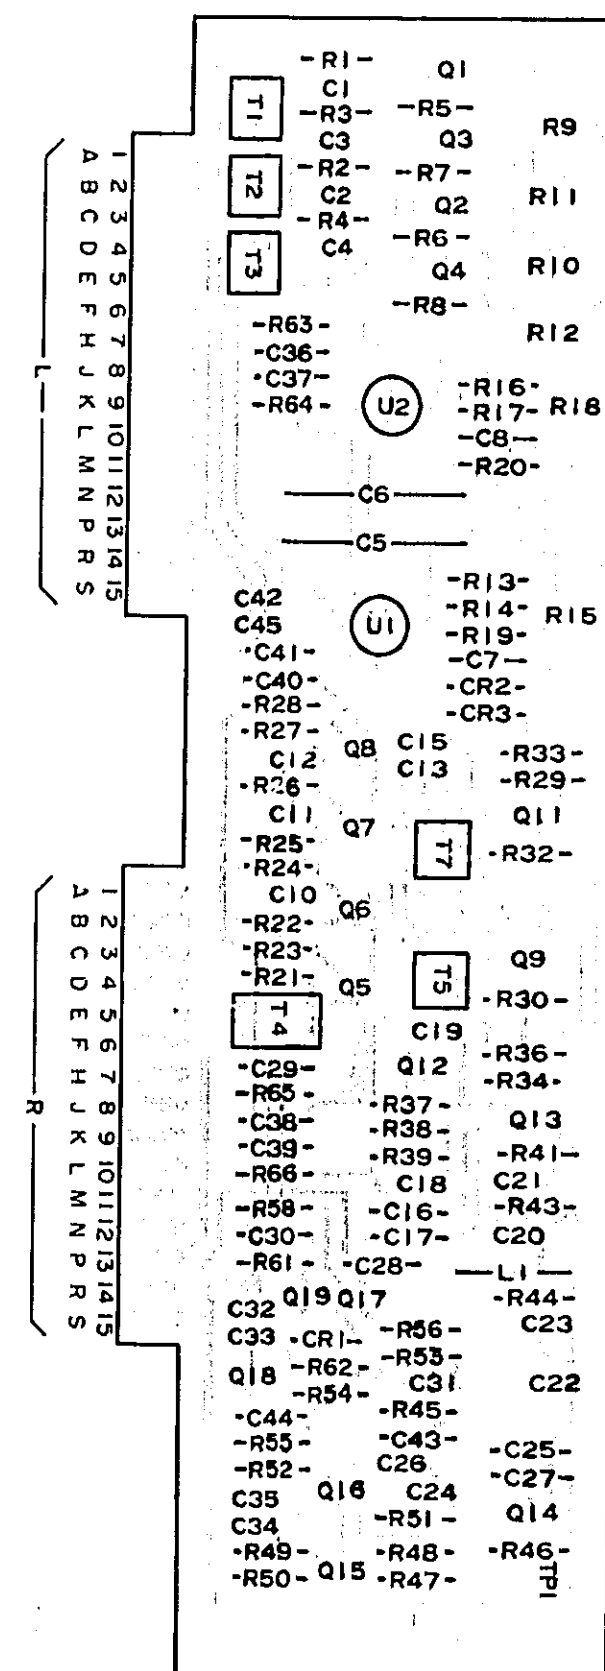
A8 Modulator Board Assembly Component Locations.
